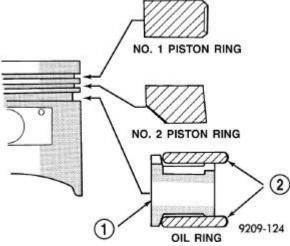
PISTON RING - INSTALLATION Courtesy of CHRYSLER LLC
